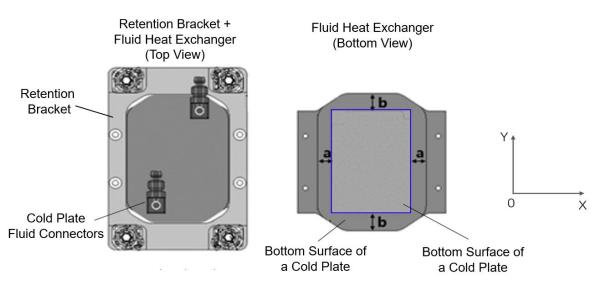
Recommended dimensions of the bottom surface of a 2-piece cold plate
